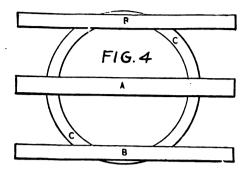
Upper Carriage Part, Fifth-Wheel Plate and Cross
